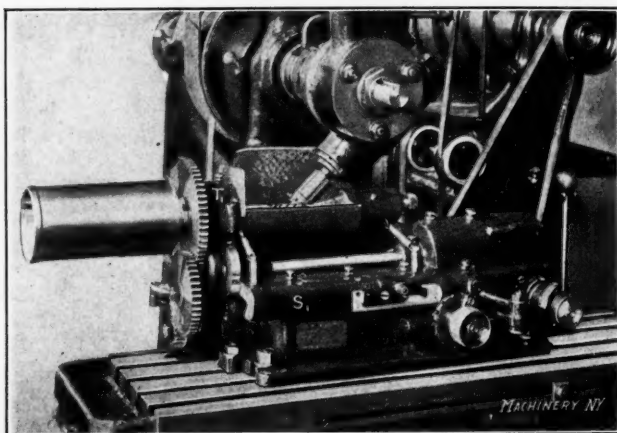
Milling the Spindle Driving Worm in a Completely Automatic Attachment for the Plain Milling Machine
